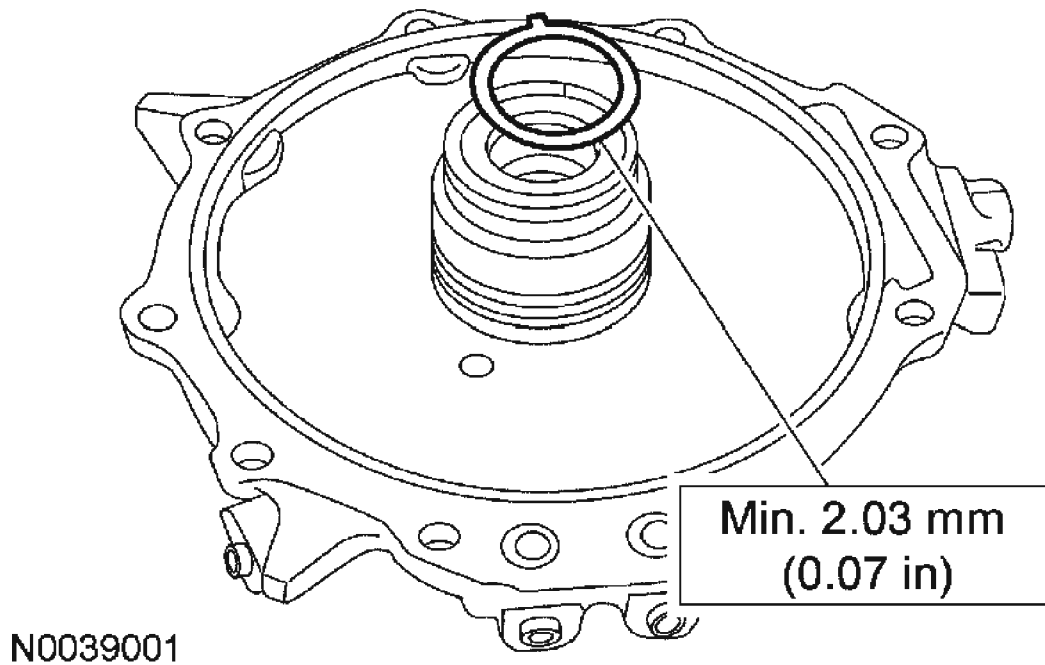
Installing Direct Clutch Hub Bearing Shim And An Additional Shim
